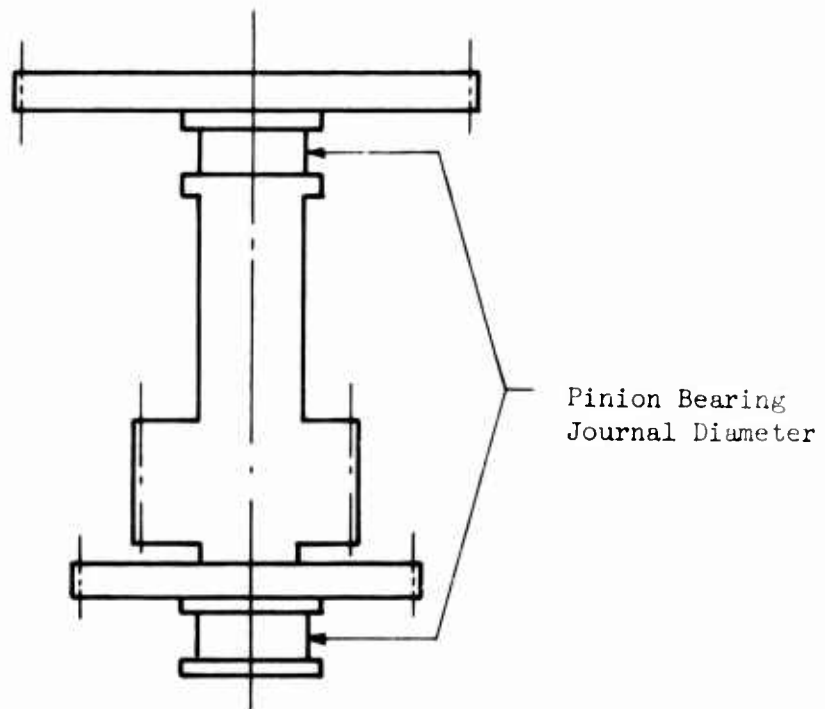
Schematic Pinion Shaft with Pinion Bearing Journal Diameters
